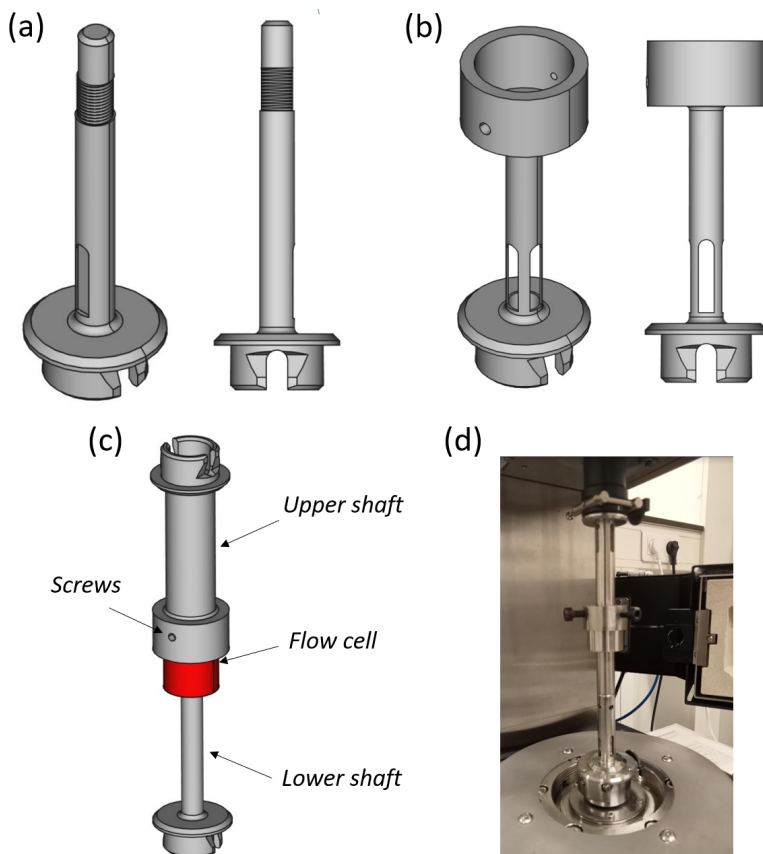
The lower shaft (a), the upper shaft (b), as well as the assembly (c) of the orthogonal rheometer tool are shown. Additionally, a photo of the assembly is presented (d).
